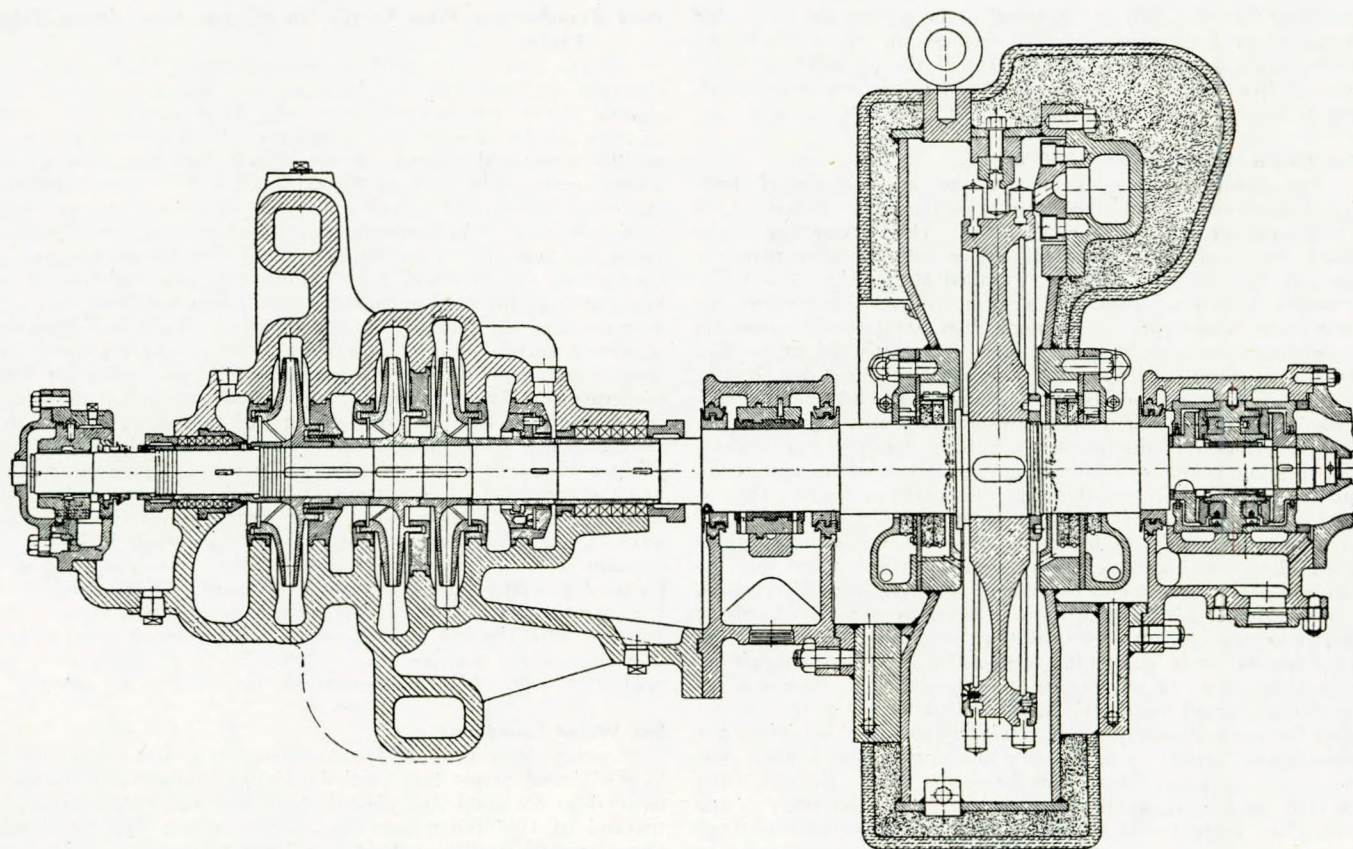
Three-stage pumping unit with three bearings and integral shaft for pump and turbine.
